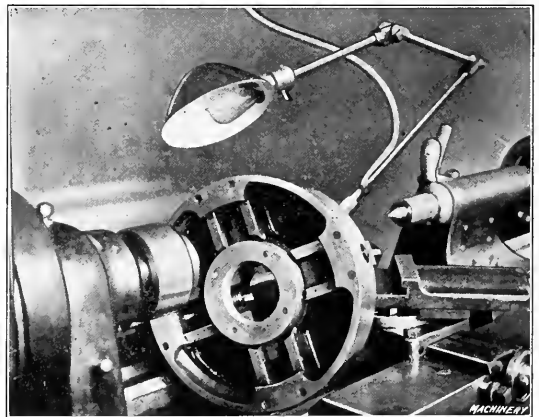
Adapter Bushing partially screwed onto Spindle of Hendey Engine Lathe
